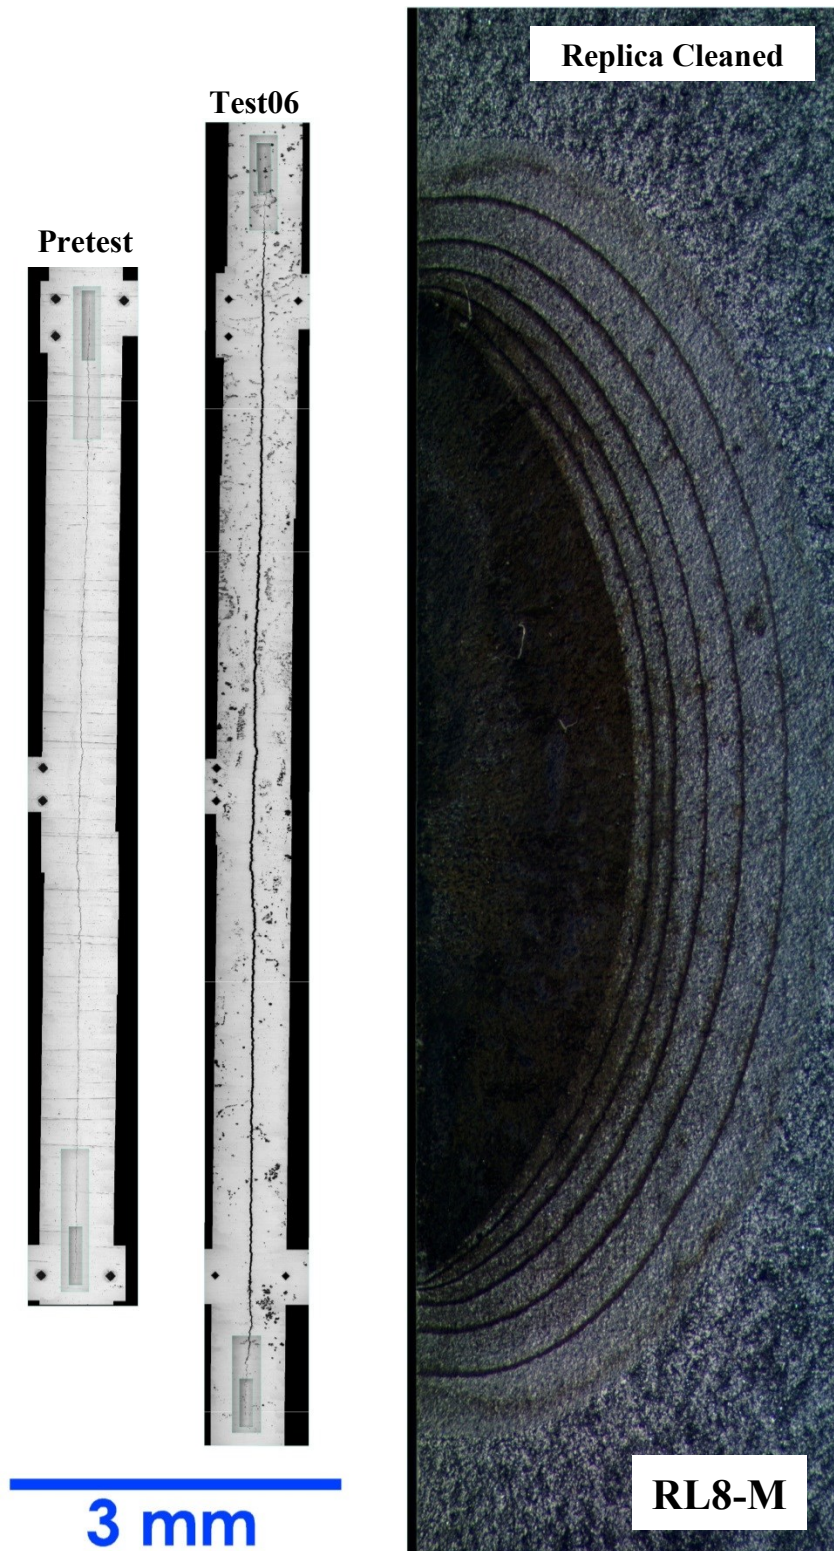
Surface images and fractograph for RL8-M. The surface images were taken prior to testing and after test06. The fracture surface was cleaned with replicating tape.
